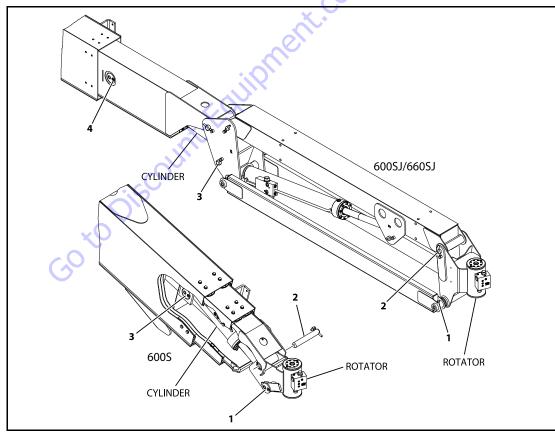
Removal of Components - Rotator and Leveling Cylinder
